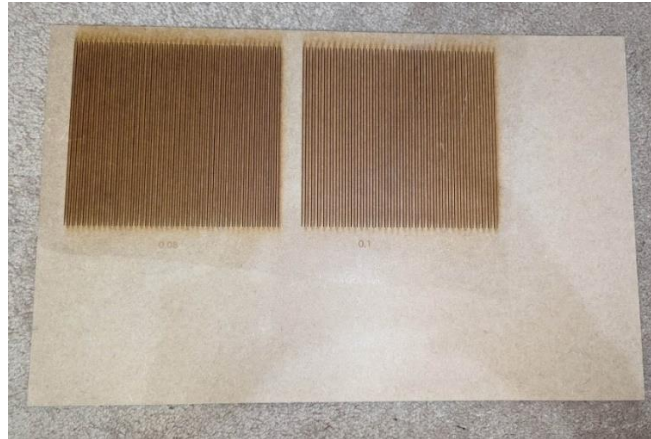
Laser-cut mold used to produce thin strips from the facemasks
